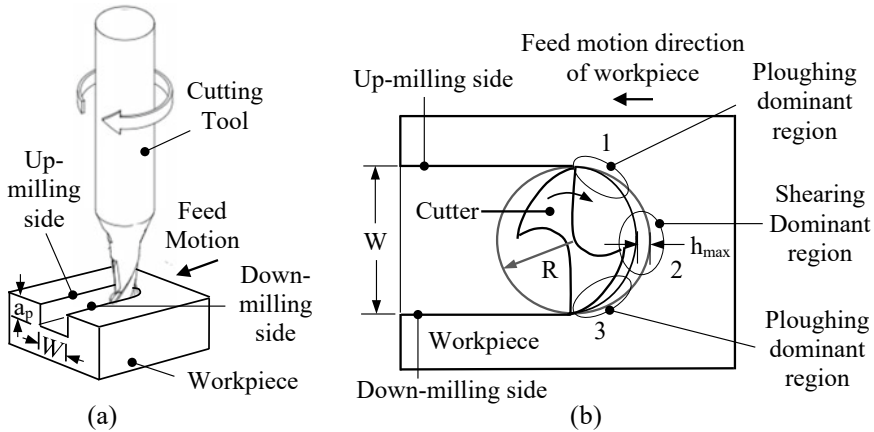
a Full immersion micro-end milling; b Geometry of micro-channel (slot) cutting in end milling process by two fluted micro-end mill of radius R ; width of the micro channel W , axial depth of cut a_p , maximum uncut chip thickness h_{max}
